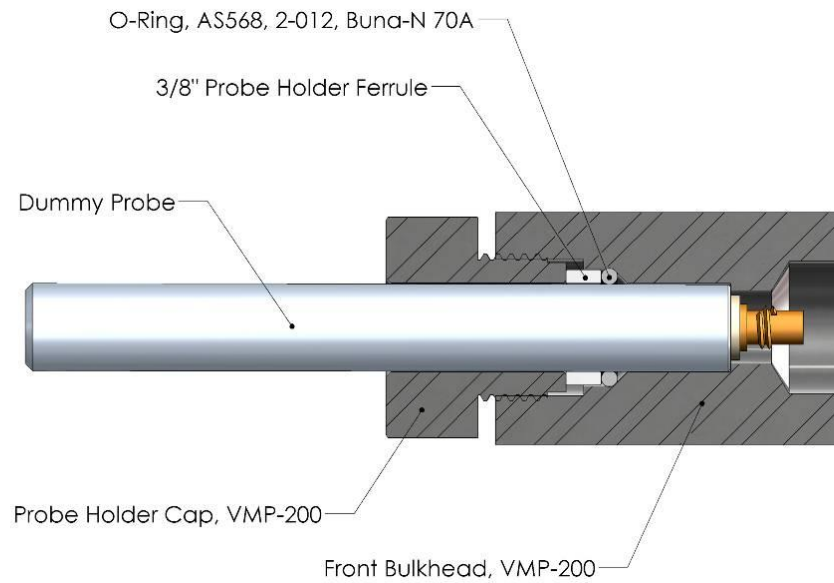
Probe holder assembly (shown from a section view of the front bulkhead).
